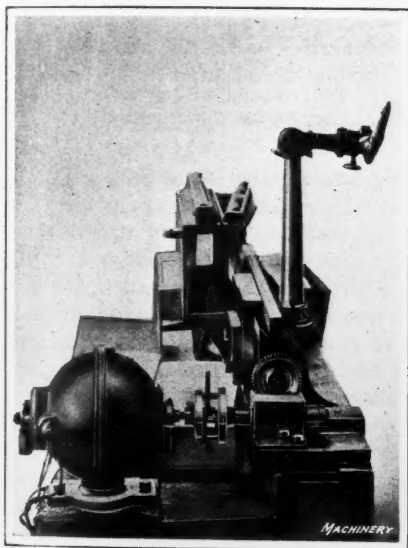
Special Machine developed by Edison Storage Battery Co. for Use in welding Side Seams of Battery Containers
